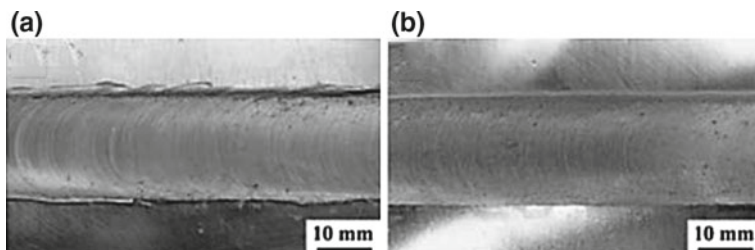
Surface morphologies of FSW 2014Al-T6 using the same process parameter. a Air cooled weld, b water cooled weld [10]
